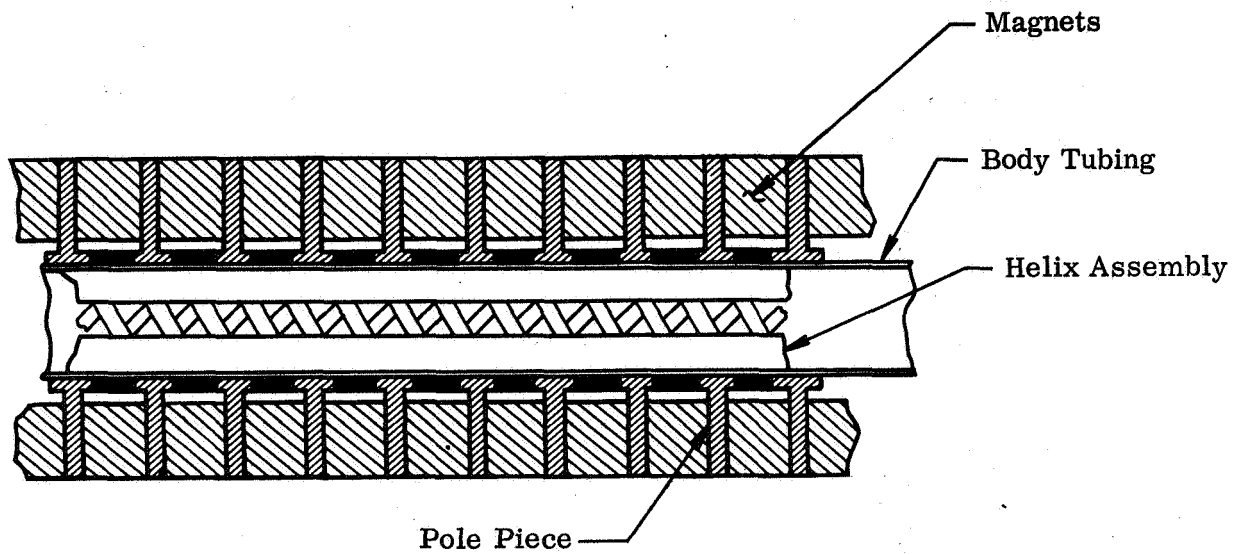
Beam focusing structure using pole pieces and magnets with equal outer diameters.
